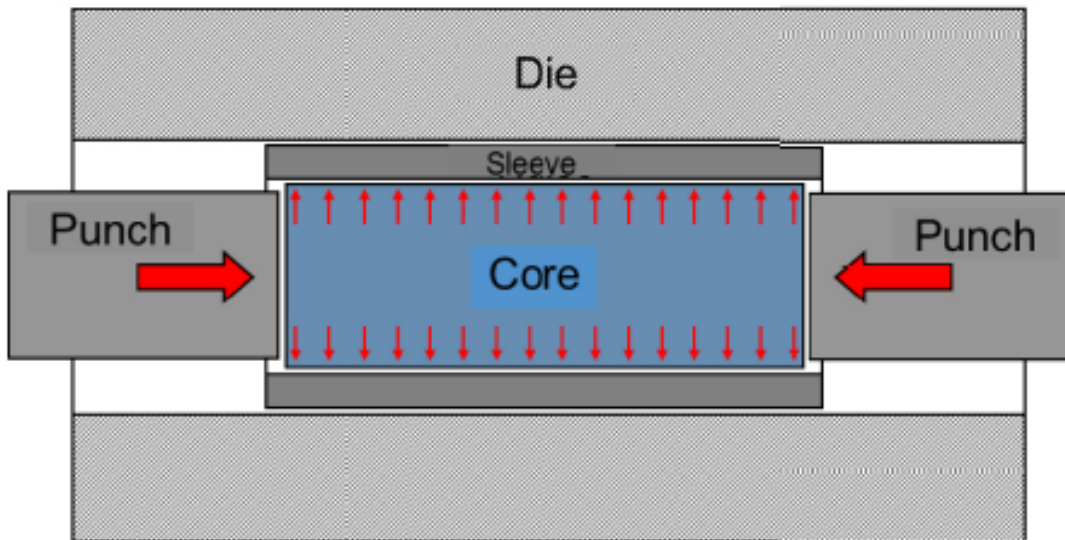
Squeeze casting technique for manufacturing of the piston pin. [from](#)
